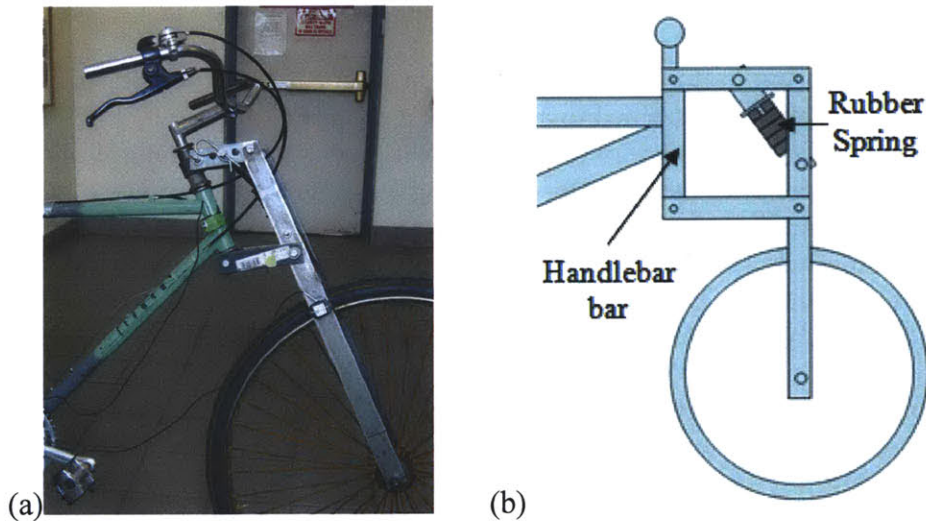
Beta-prototype. (a) This photograph of the beta-prototype shows the suspension system in an uncompressed form. The bar attached to the handlebars has been shortened, relative to the alpha-prototype. (b) This diagram of the beta-prototype allows easier viewing of the structural changes.
